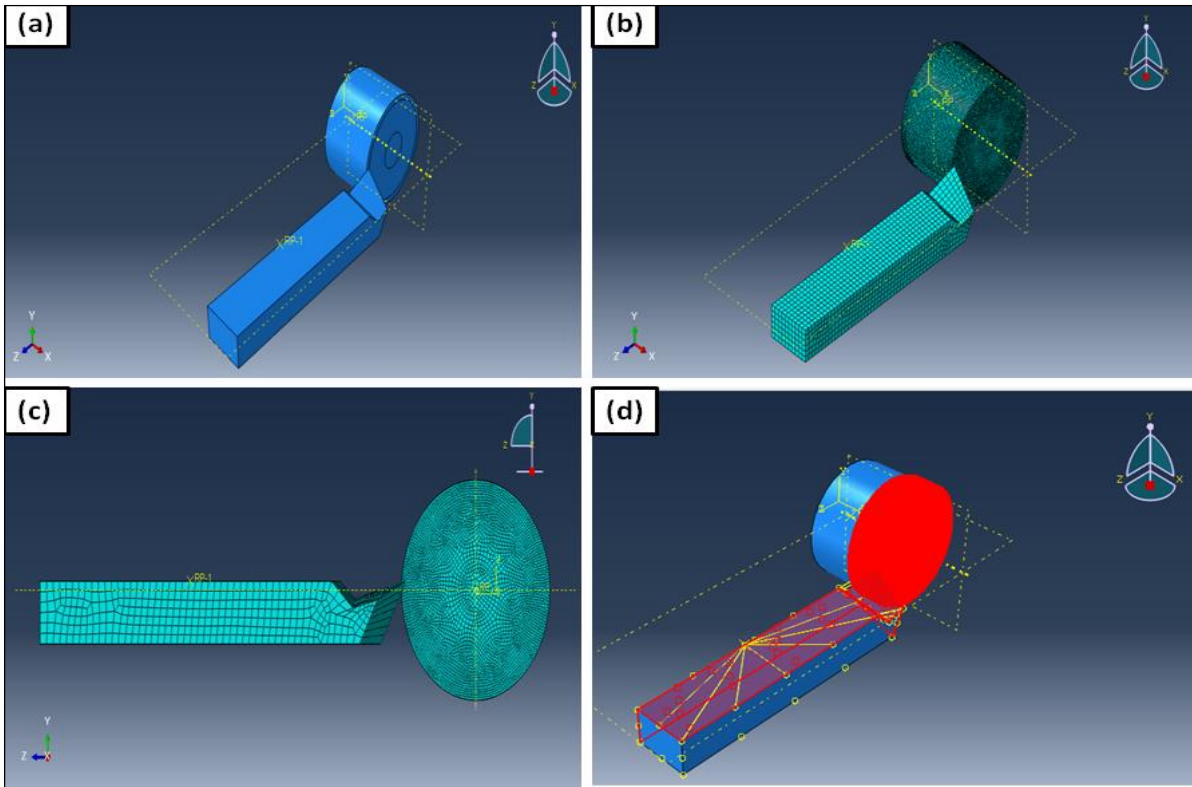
(a) Assembly (b) Meshing Top view (c) Meshing Front view (d) Surface to Surface contact
